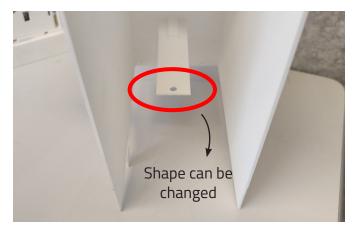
Flat face of the housing lock can be changed to make it more triangular - will help push wires away
